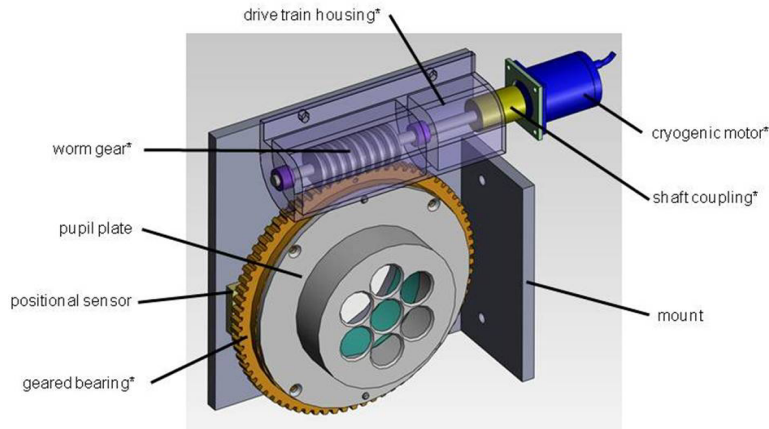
The GMTNIRS pupil rotator mechanism. Labels with asterisks (*) indicate components of custom worm drive assembly.
